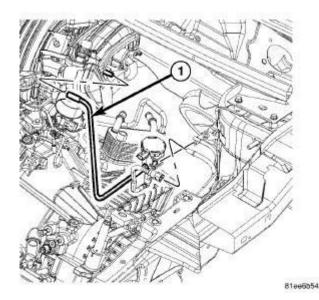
Brake Booster Vacuum Hose Courtesy of CHRYSLER LLC
